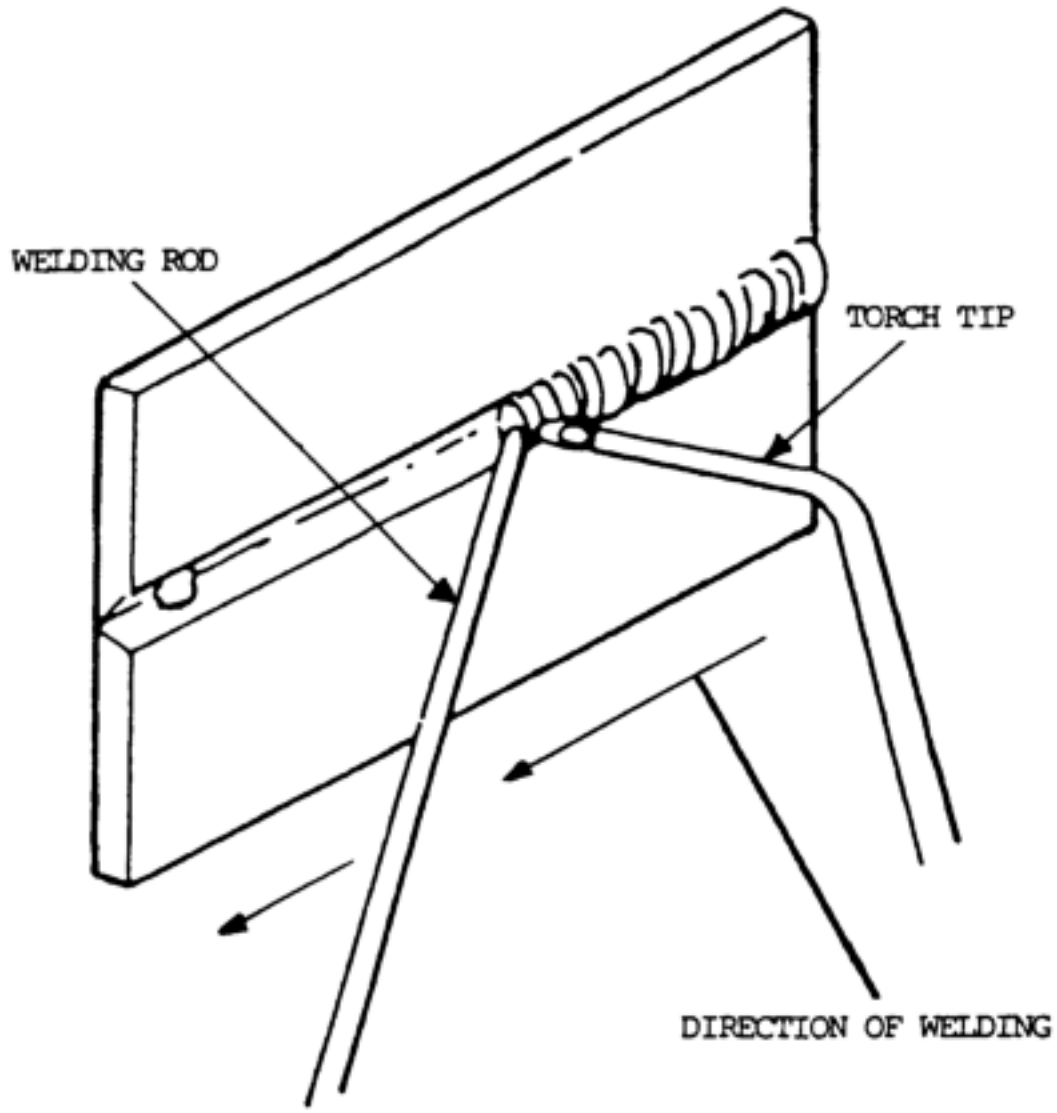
Welding a butt joint in the horizontal position.
